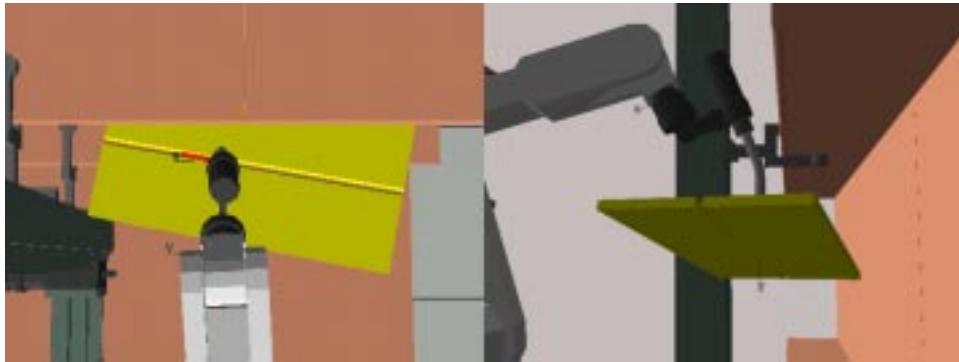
At a later stage, when it turned out that all seams in practice were straight, only such workpieces were used for simulation experiments. A V-groove weld simulation is displayed in this picture.
